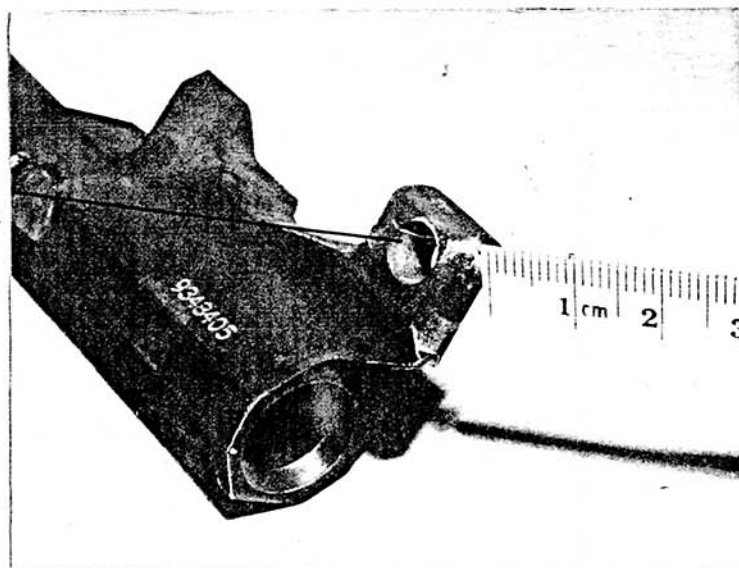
Ammunition damage caused during manufacturing (arrow).
